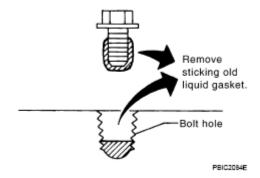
Removing Liquid Gasket From Bolt Hole And Thread
